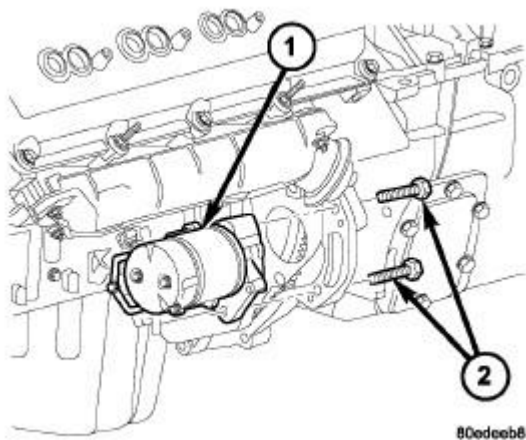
STARTER REMOVE/INSTALL - 5.7L
